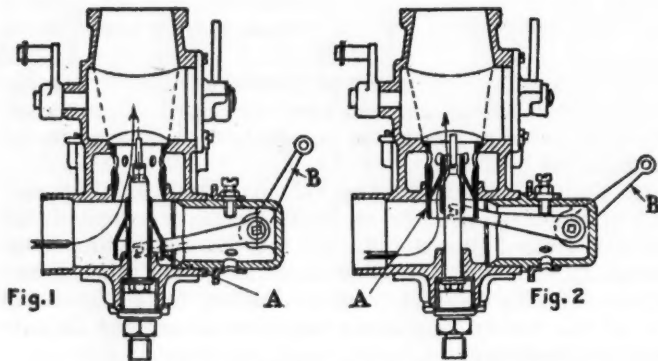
and 2—Carbureter with special choke used in starting employed on Mannesmann-Mulag buses
